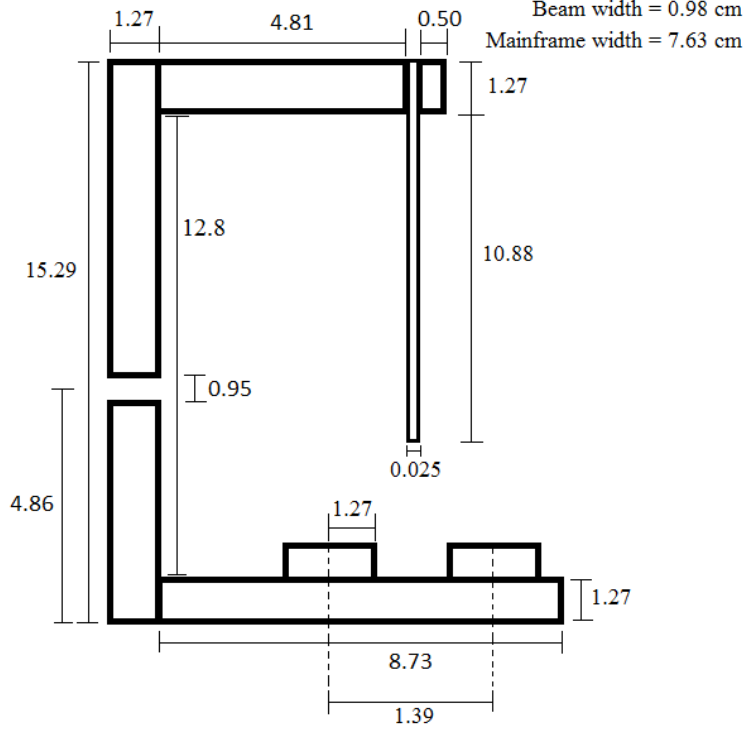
2-D Cross section of setup with dimensions in given in cm. Figure not drawn to scale.
